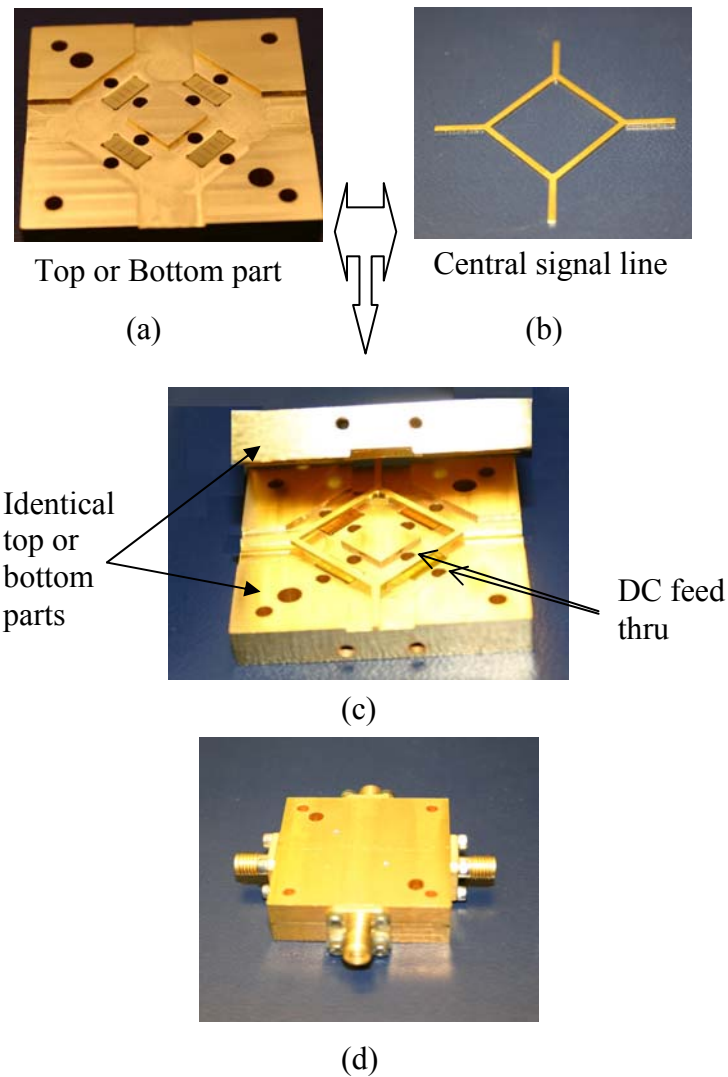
Fabricated coaxial c-type switch (a) top or bottom parts, (b) central signal line, (c) integration of the switch, and (d) integrated RF MEMS coaxial C switch.
